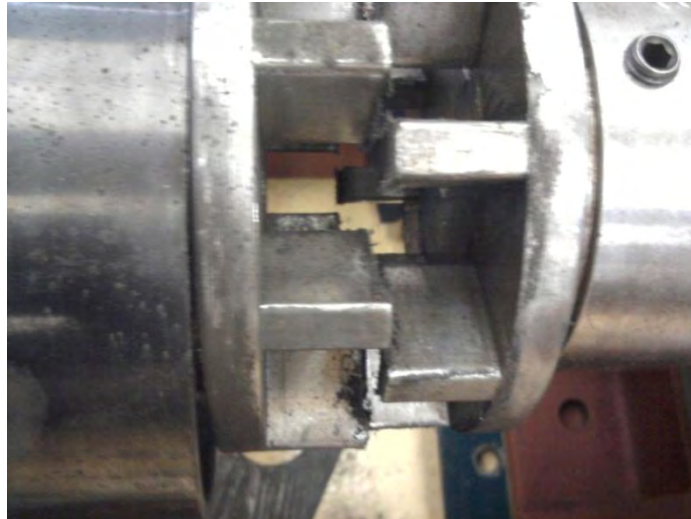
Radial misalignment of Quick-Flex[®] coupling with element removed
